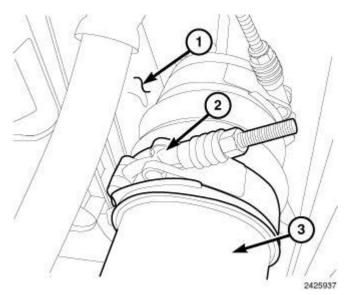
Charge Air Cooler (CAC), Clamp & Charge Inlet Tube Courtesy of CHRYSLER GROUP, LLC
